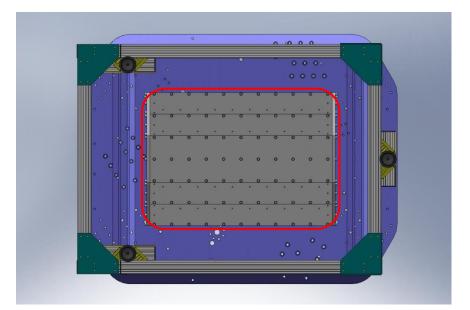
Torque bottom Stiffener Assembly bolts to final spec.
